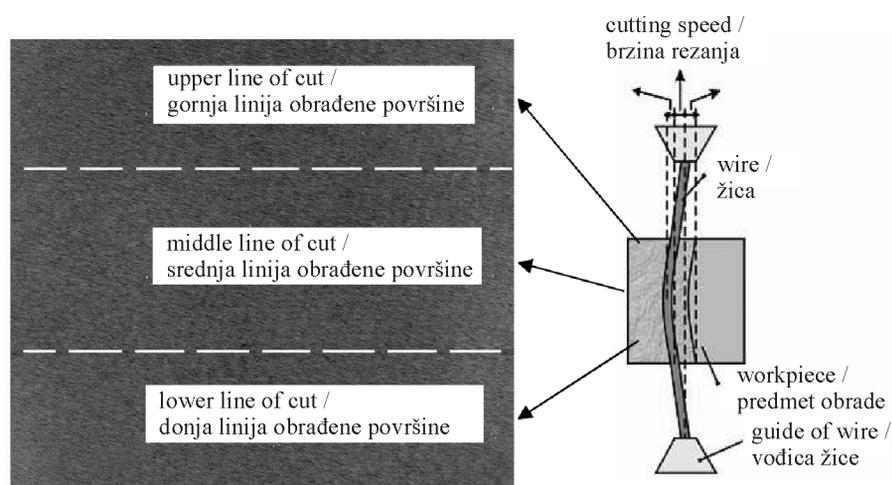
Surface appearance machined with wire electrical discharge machining [7]
